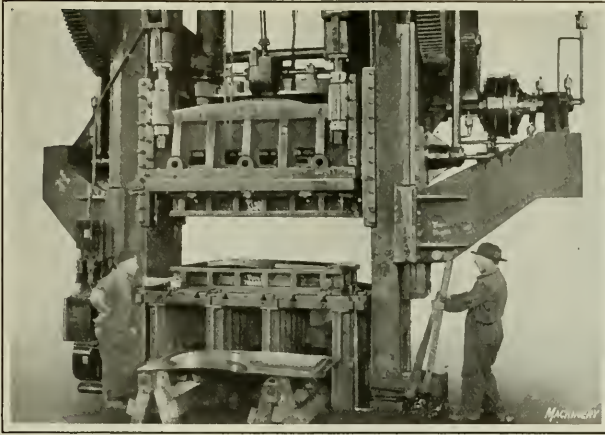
Toggle Drawing Press with a 9-inch Crankshaft, making Wheel Housings
